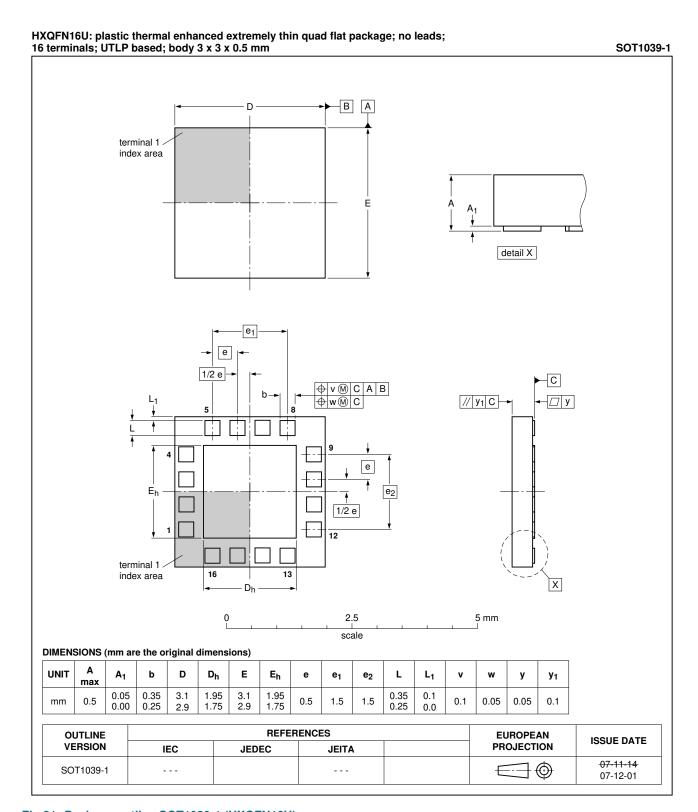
Package outline SOT1039-1 (HXQFN16U)
